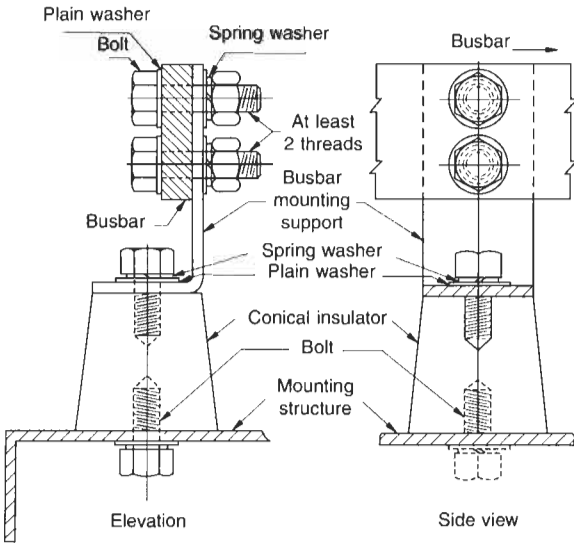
(b) A typical mounting and fixing arrangement of a conical insulator and a flat busbar
